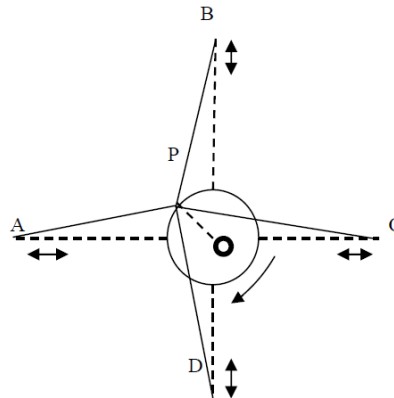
Space diagram of the mechanism of four-way hacksaw machine
